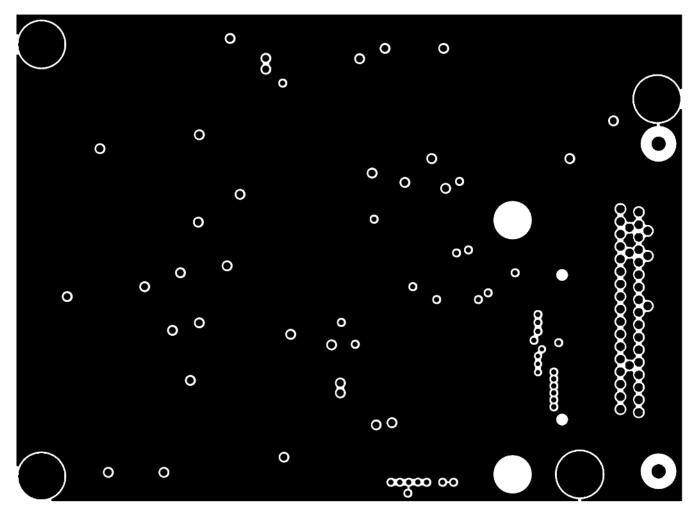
ADS9110EVM PCB Layer 2: GND Plane
